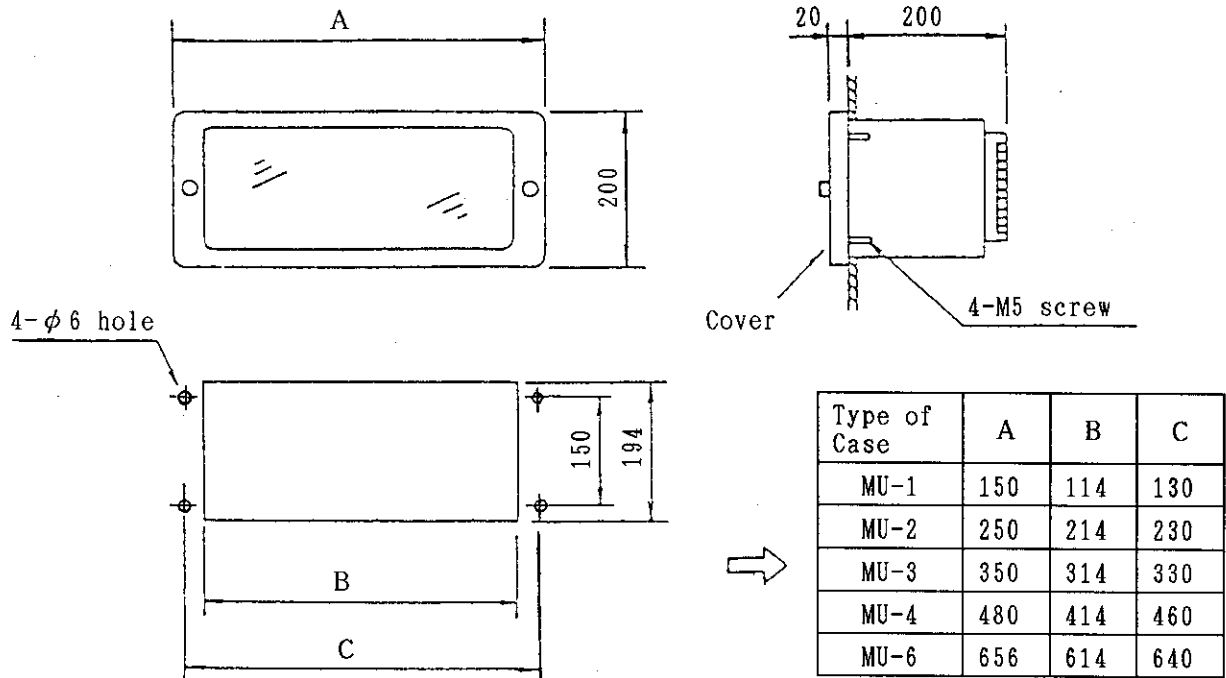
Outline and Panel Drilling Dimensions (Unit: mm)
